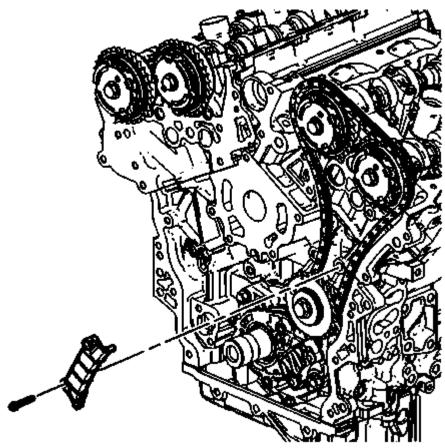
View Of Left Bank Secondary Camshaft Drive Chain Guide Courtesy of GENERAL MOTORS COMPANY
